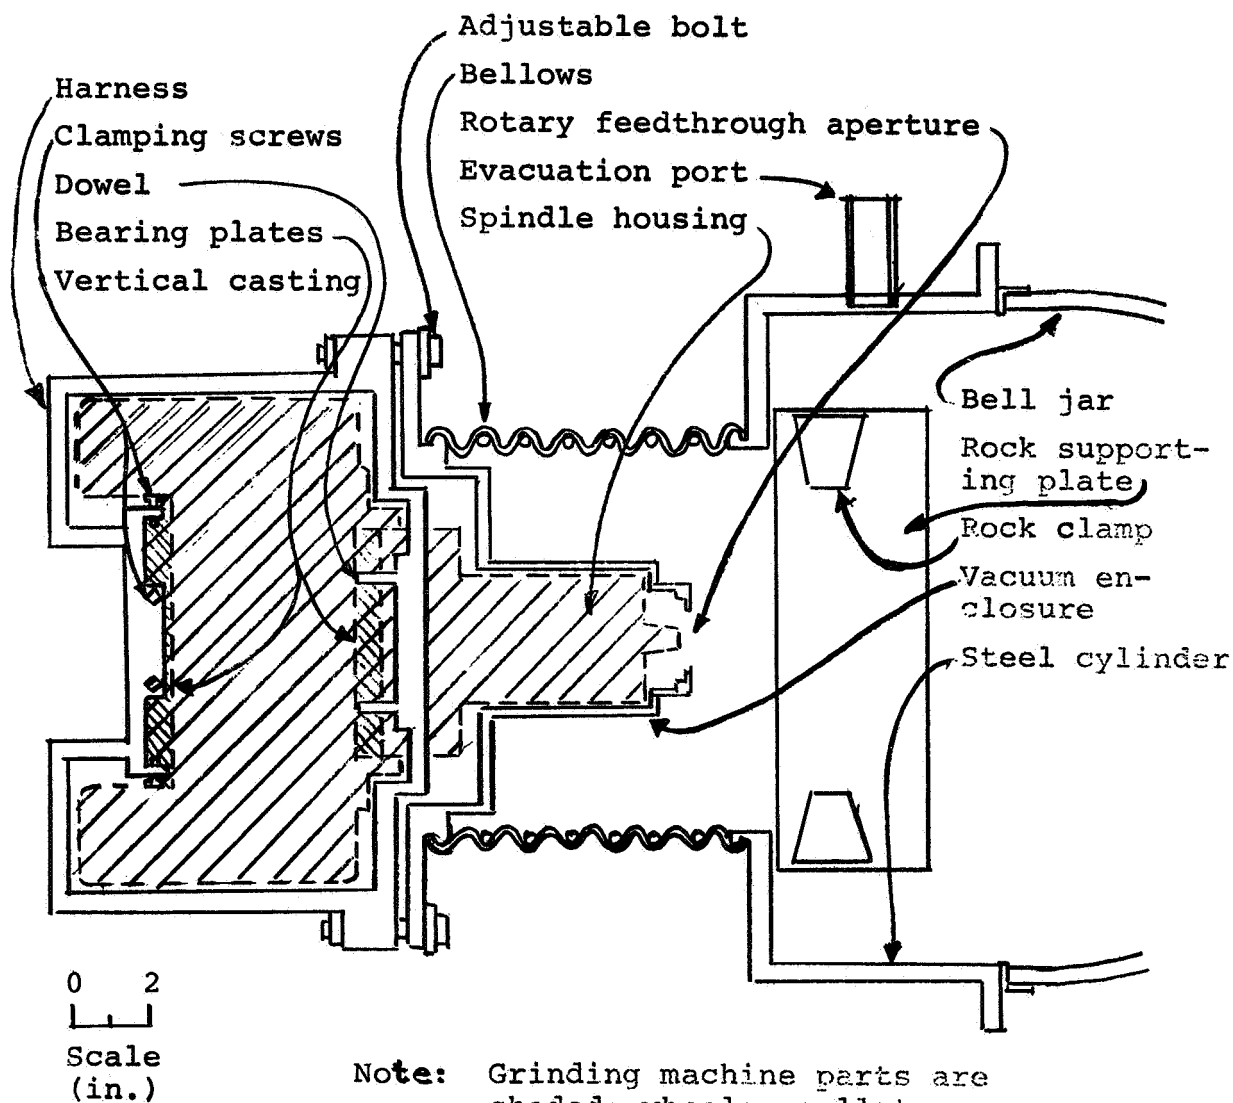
TOP VIEW OF VACUUM SYSTEM
